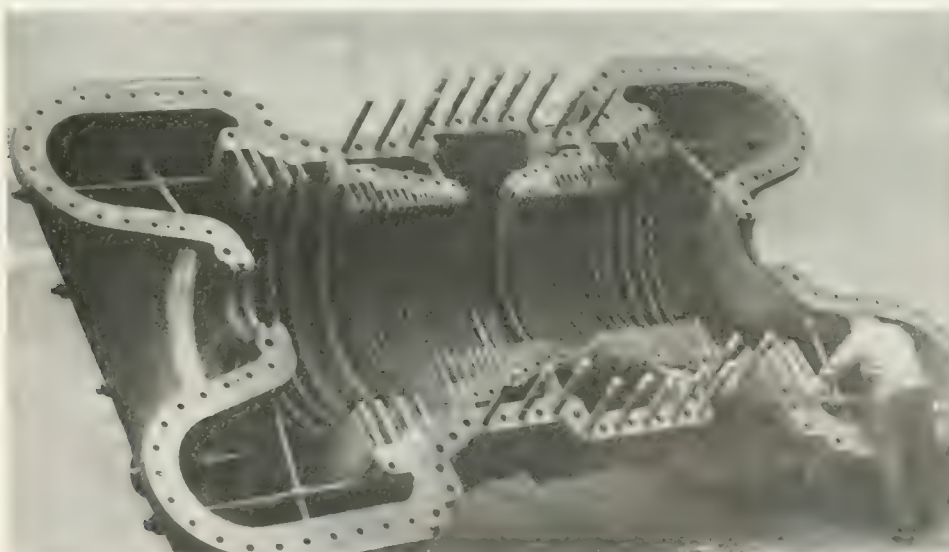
TURBINE CASING FOR THE SPINDLE SHOWN IN FIG. 3
